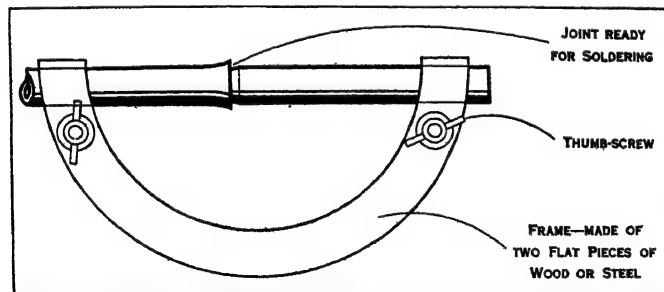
METHOD OF HOLDING PIPES IN POSITION FOR MAKING A JOINT
